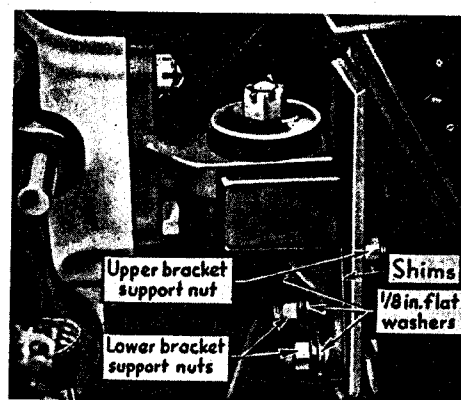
The intermediate support bracket on the Cadillac engines should be tightened to the frame as the final operation in adjusting the engine supports
